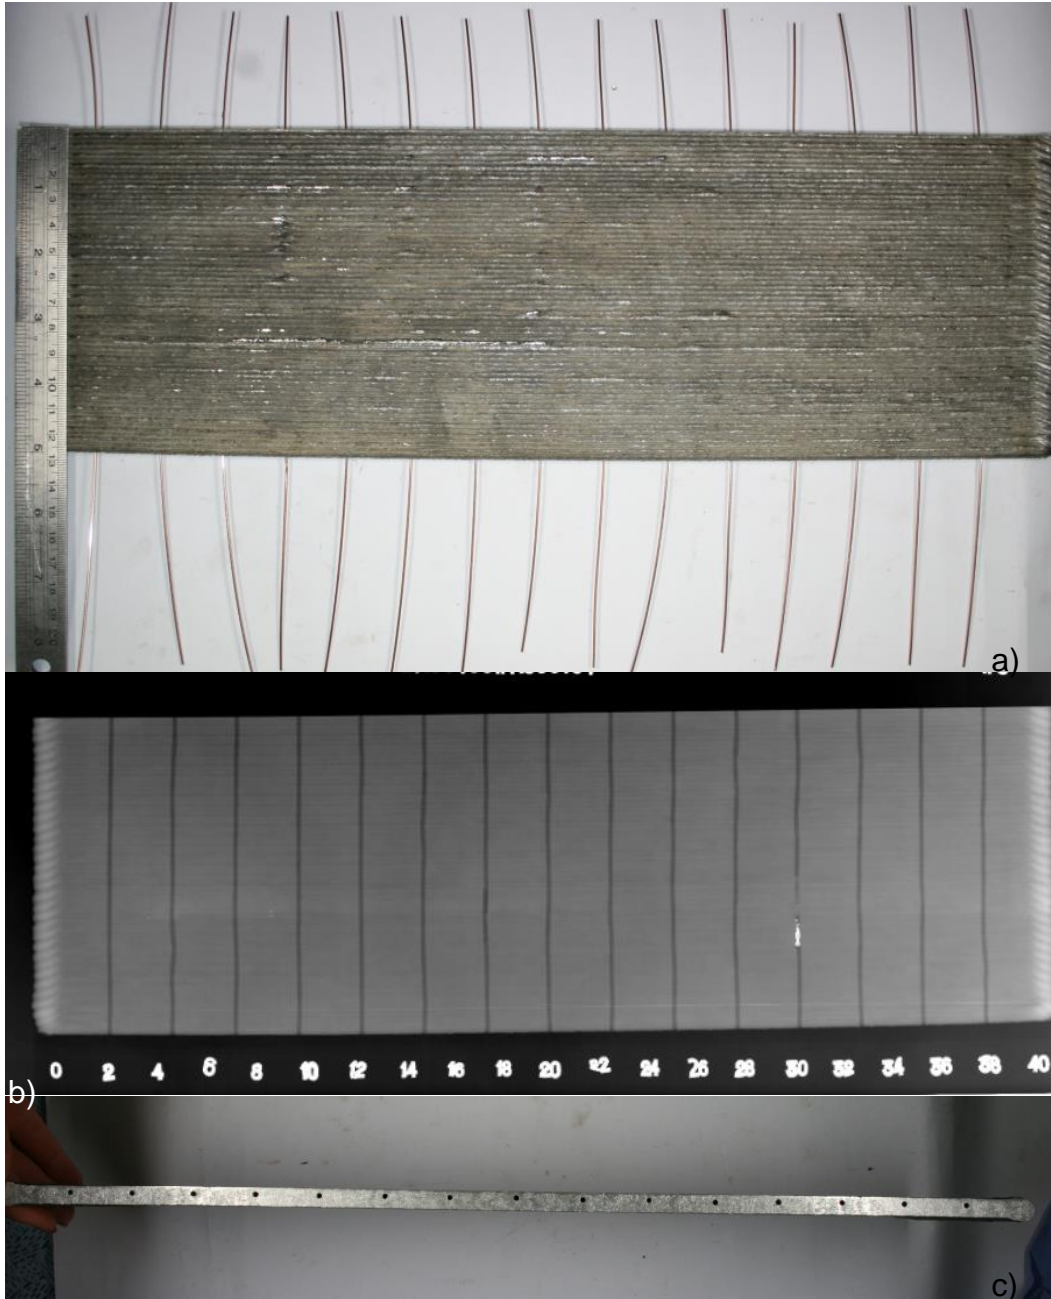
Structure manufactured by integrated deposition and machining (milling and drilling) process a) external front view of the structure b) photo of X-ray inspection c) top view of the structure
